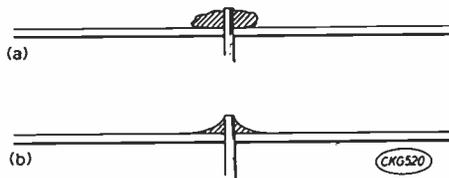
(a) A 'dry' joint, showing the blob of solder due to insufficient heat or dirty surfaces. (b) A good joint, showing smooth flow of solder over joined surfaces.
